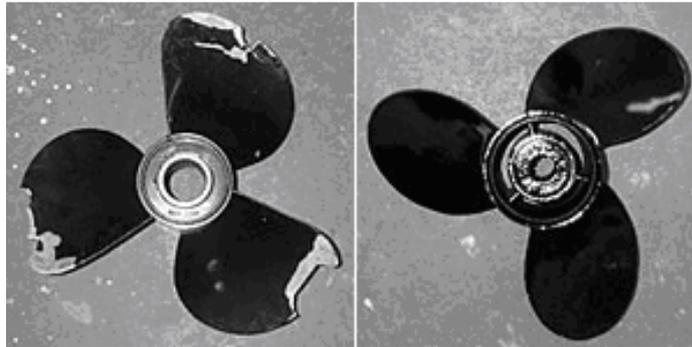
Repair welding example of a propeller (Brainerdrops)
